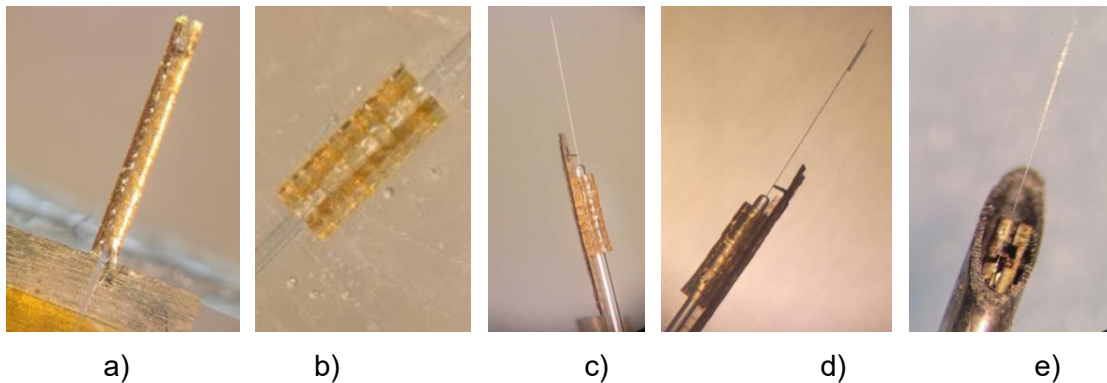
Packaging of the sample: a) semi-circle collars placed in the actuator groove; b) upper collars attached to the fiber; c) assembly of cantilever and actuator parts; d) an asymmetry is added to the cantilever tip; e) assembled device fixed inside the nitinol needle.
